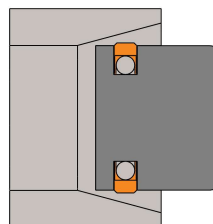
Remove plastic strip. Place resizing sleeve onto piston.
